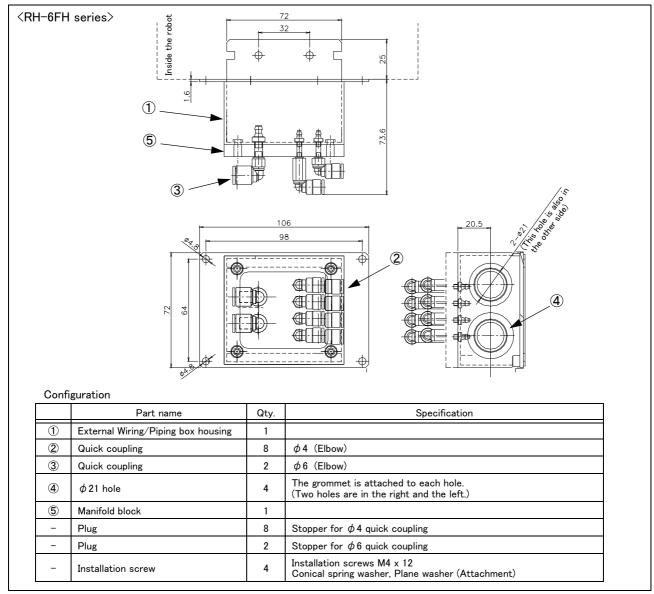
Outline dimension and configurations (RH-6FH series)
